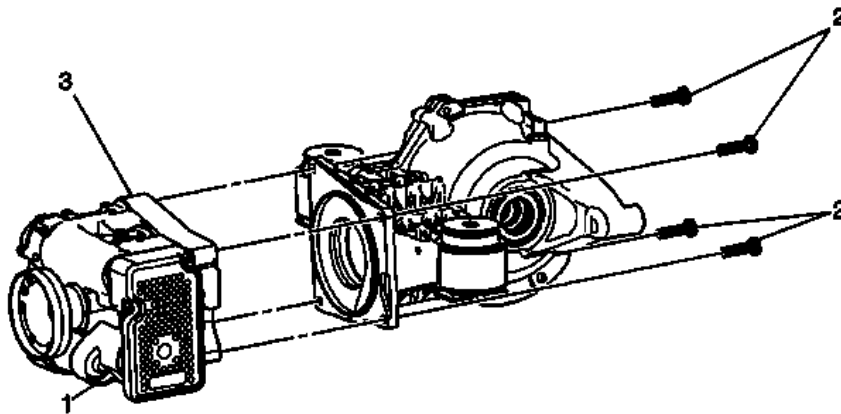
Identifying Differential Clutch Assembly, Cover & Bolts
